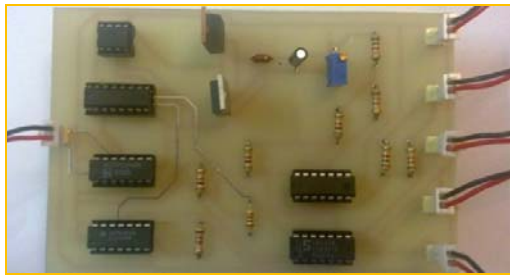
PCB and assembly circuit of synchronous buck converter with PFM control and hard switch.
